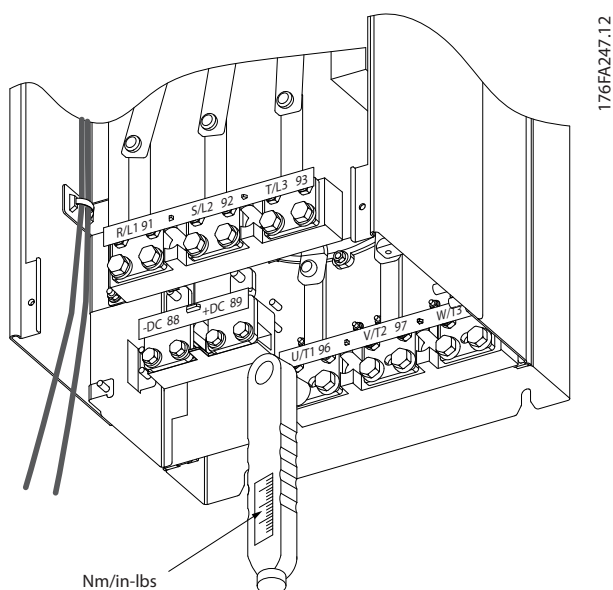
Always use a torque wrench to tighten the bolts.
